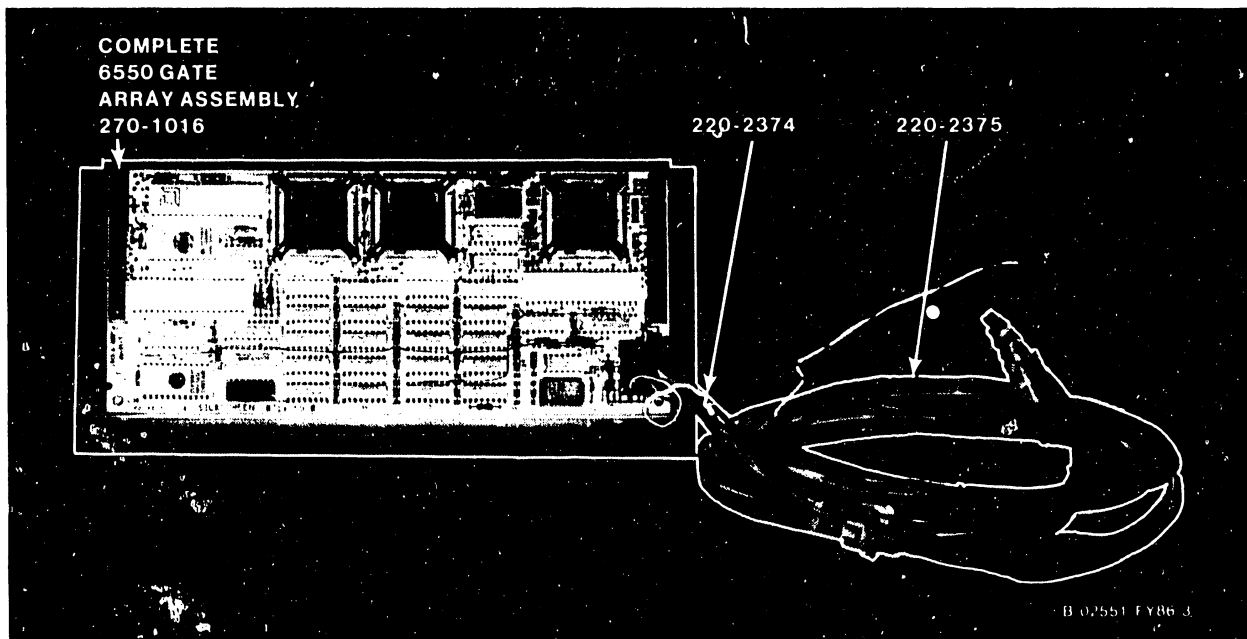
VS-300 Gate Array TC Back Panel Assembly With Cables
